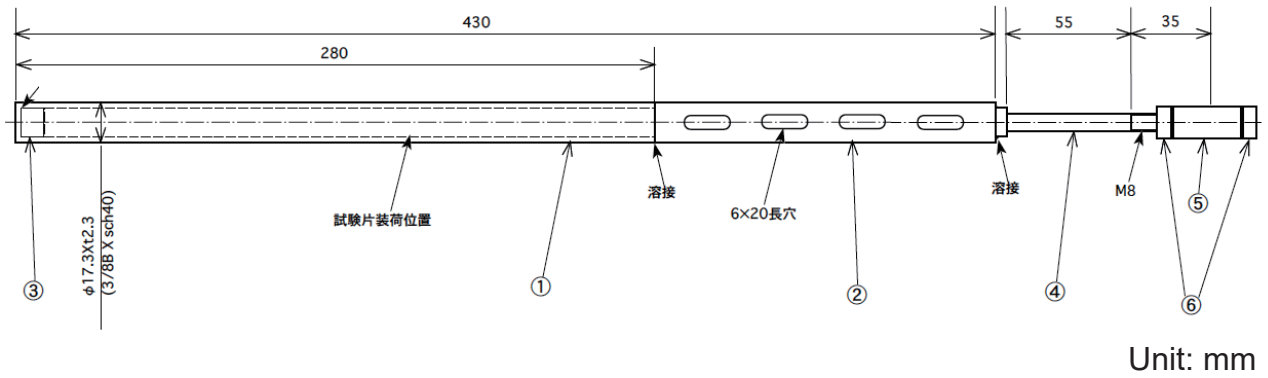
Drawing of the specimen holder for plate type specimens.
